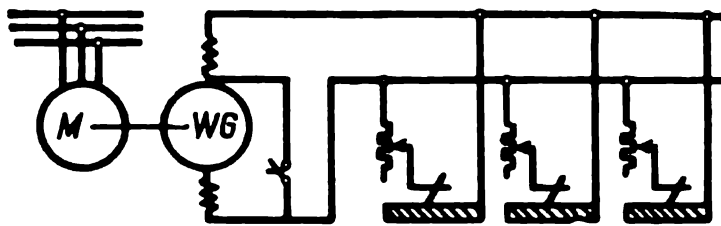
Welding stations supplied by a multiple-operator generator
